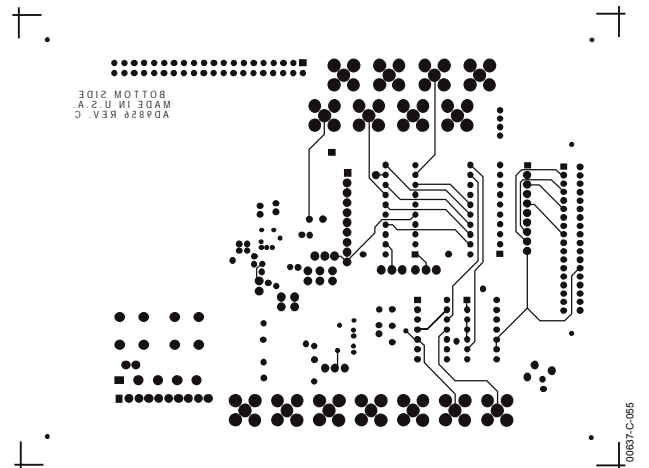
PCB Lay Out Pattern for Four-Layer AD9856 PCB Evaluation Board Layer 4 (Bottom)—Signal Routing
